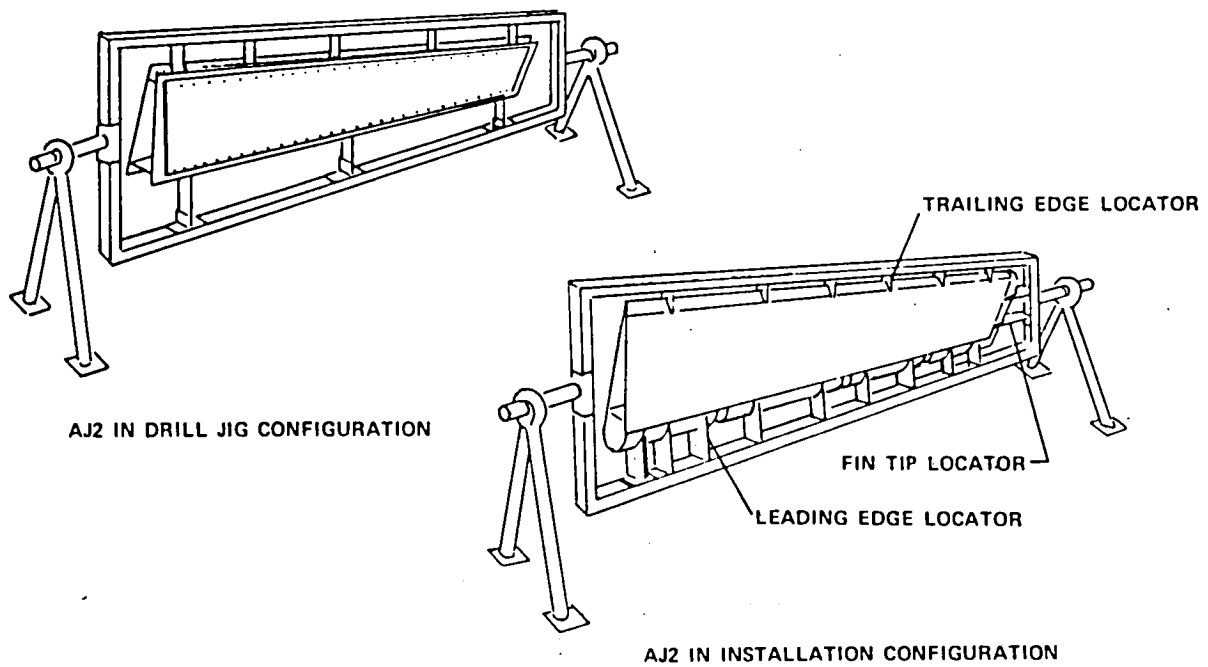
DRILL AND LOCATOR ASSEMBLY TOOL
